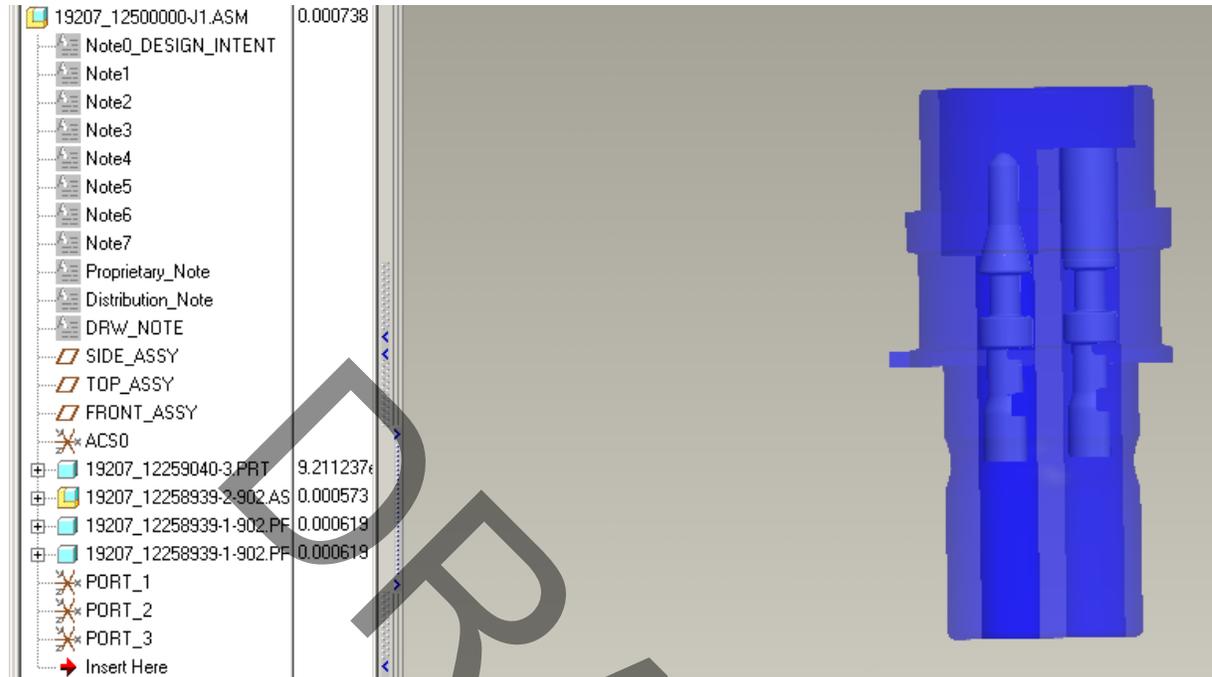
CONNECTOR ASSEMBLY EXAMPLE
